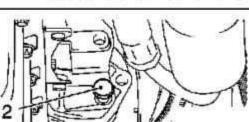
Mounting the front and rear of the gearbox: 1, 2 - bolts fixing
